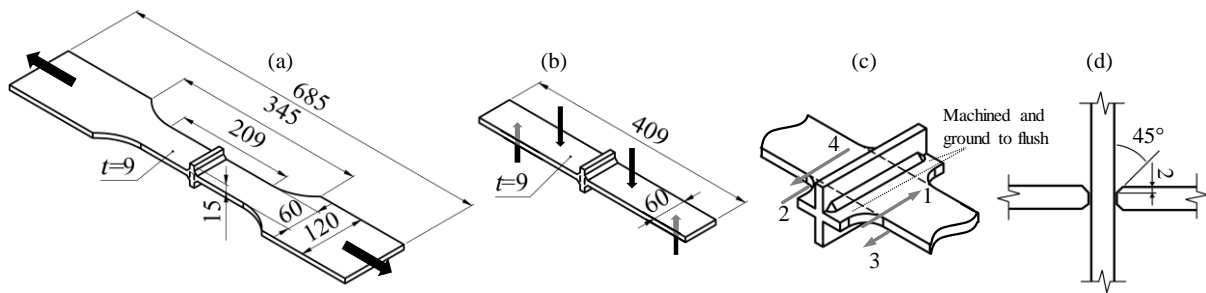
Shape (after removing weld run-on and run-off parts) and dimensions of the test specimens: (a) axially and (b) bending loaded LC joints; (c) sequence of welds and preparation of the specimens; and (d) partial K-groove preparation used in the FWB_DYN7 and FWB_DYN8 specimens (all dimensions in mm).
